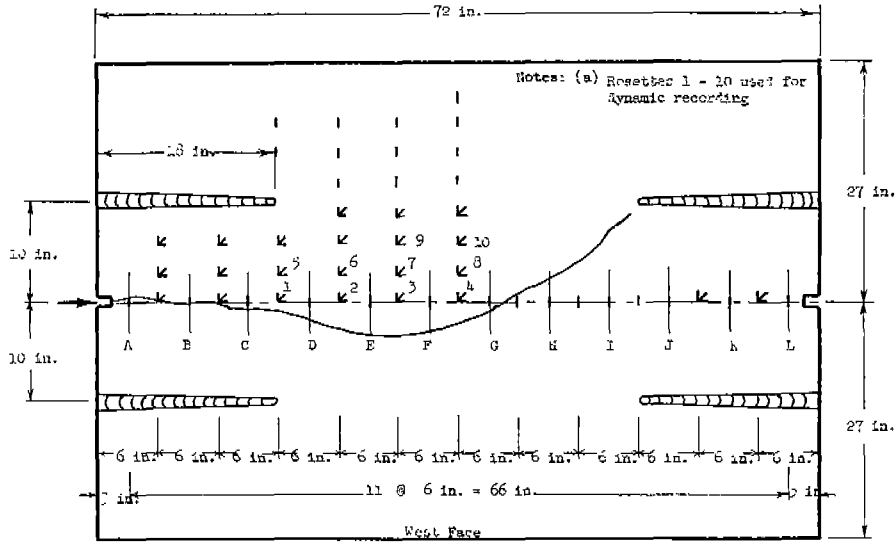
INSTRUMENTATION LAYOUT AND SLOT CONFIGURATION - TEST 49.
